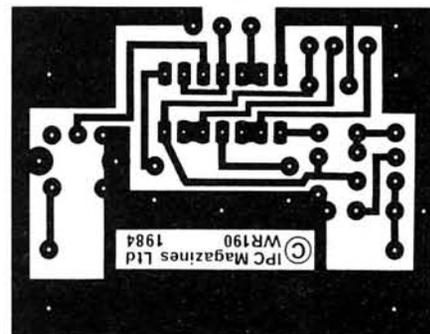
The track pattern and component layout of the new switching board, shown full size
